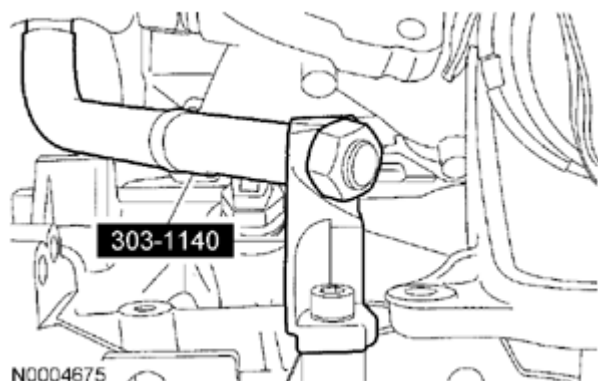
Locating Upper Half Of Engine Lifting Bracket Set
